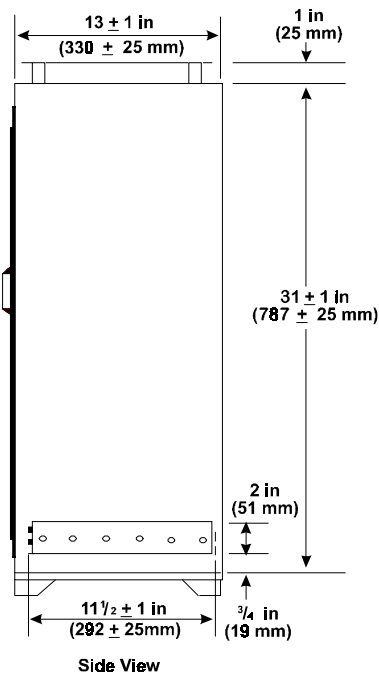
Side View of Horizontal Bunsen Burner Test Cabinet
